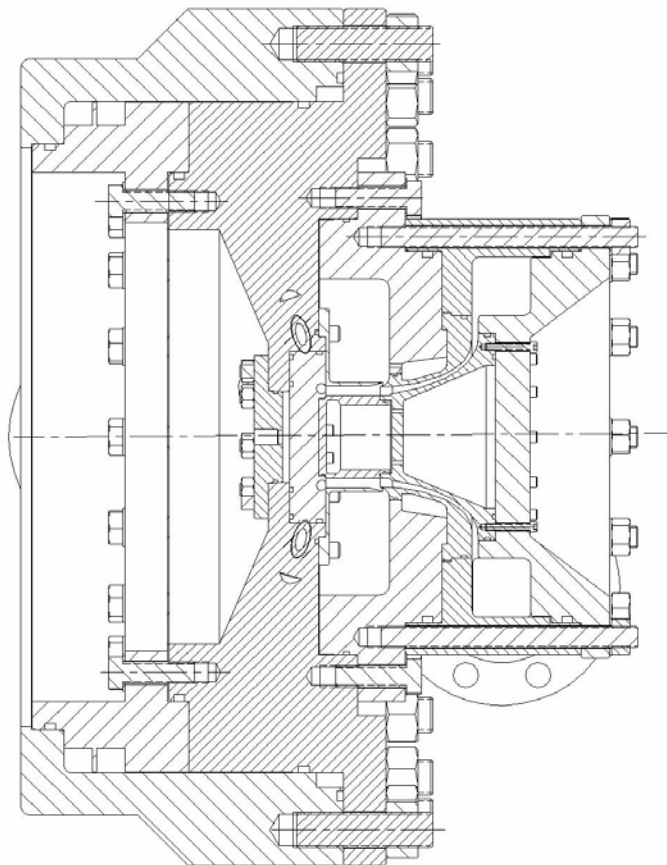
Cross Section of Multiple Nozzle Prototype Integral Separator
